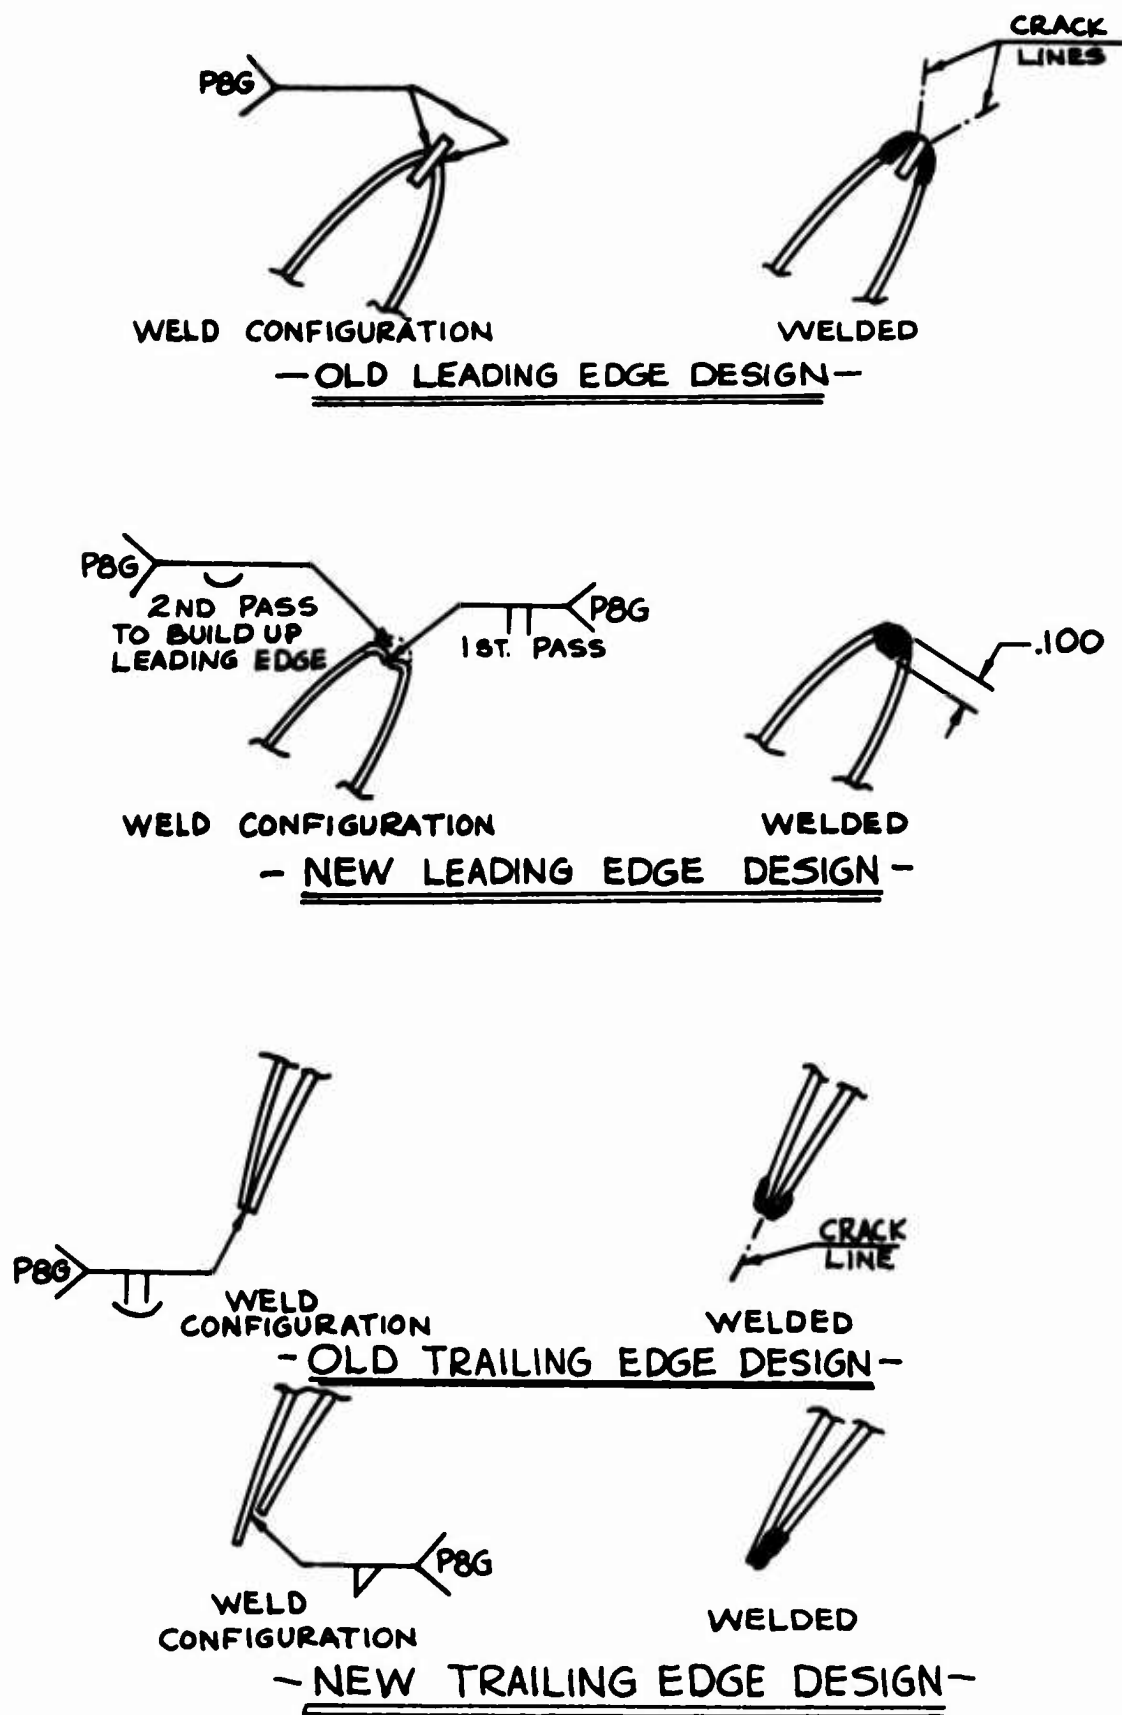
Lift Fan Inlet Circular Vane Leading and Trailing Edge Weld Design Change
